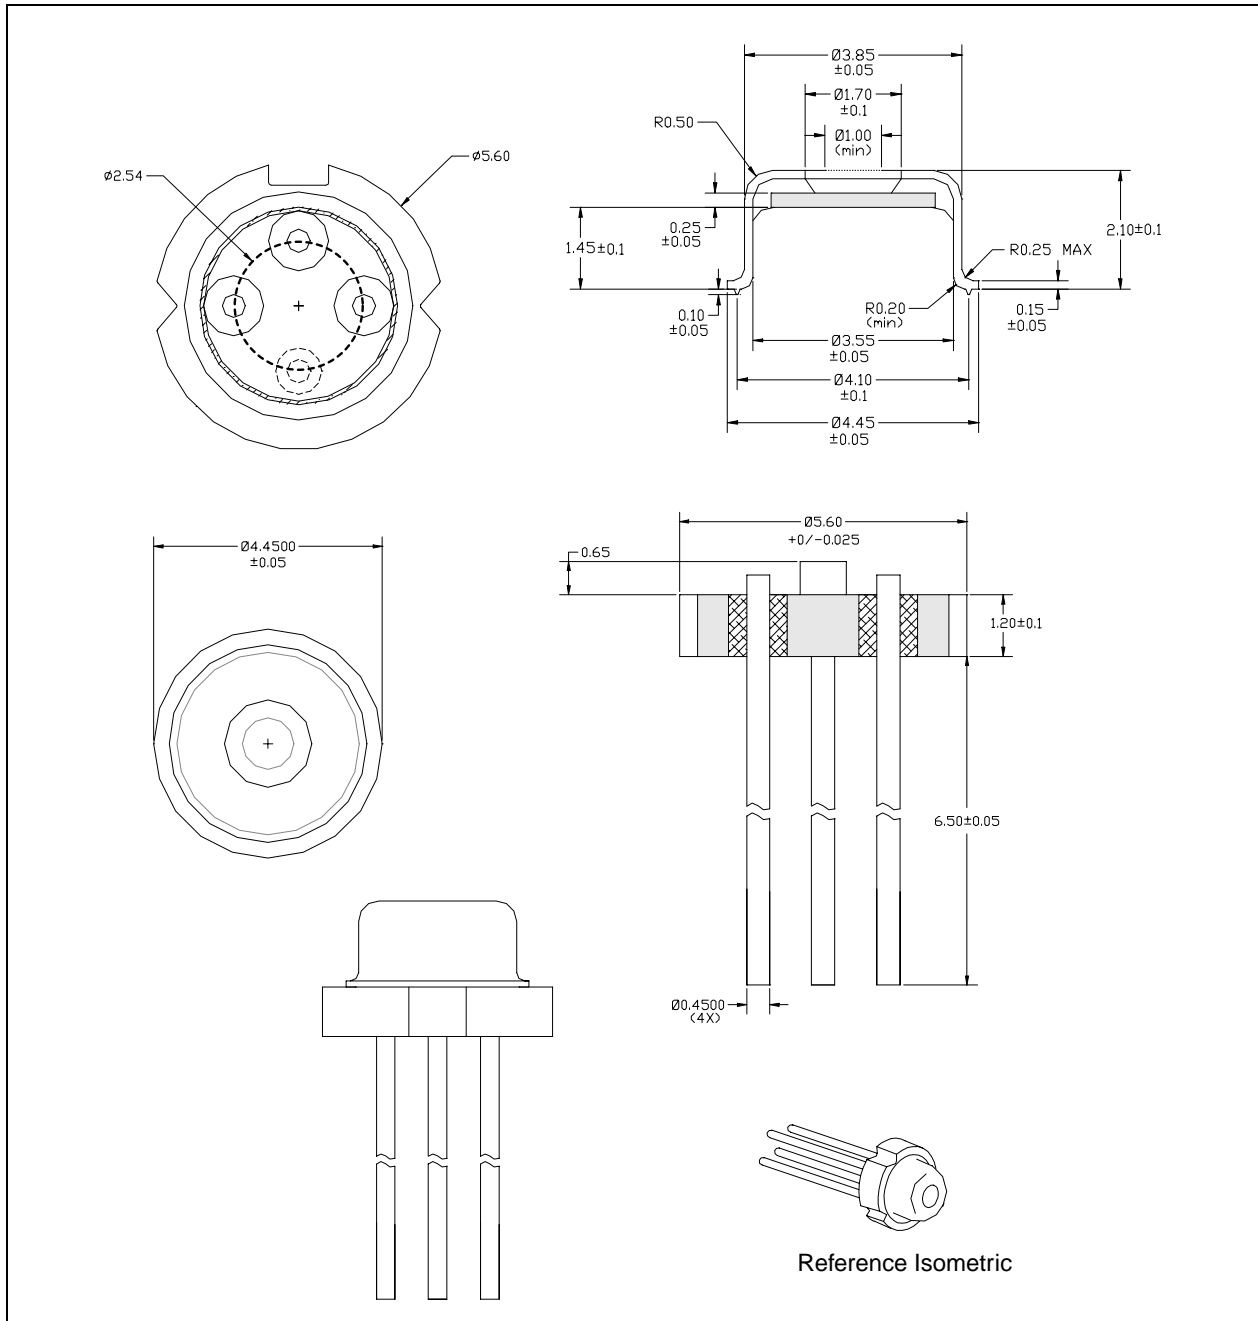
Package Drawing for TO-56 Flat Window (WB)
